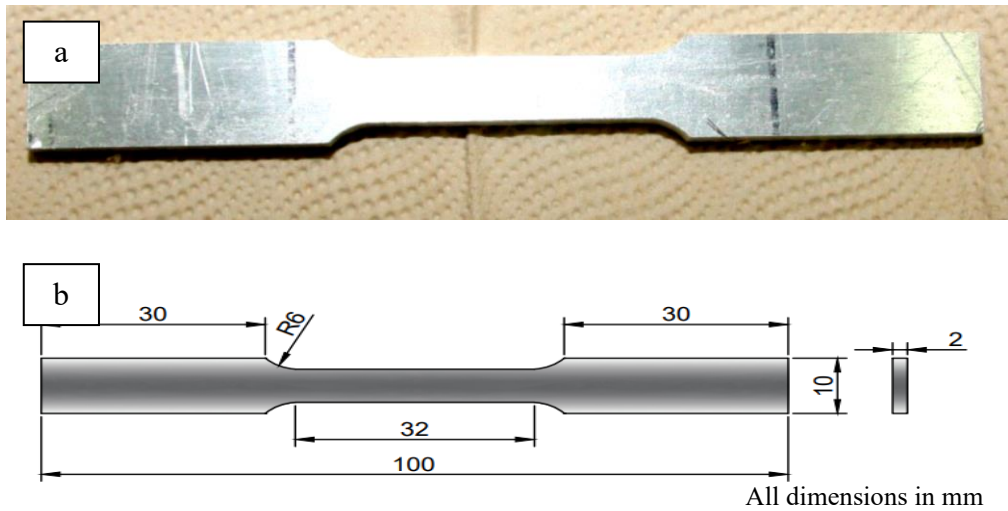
Manufactured tensile test specimen (a) photograph (b) schematic.
